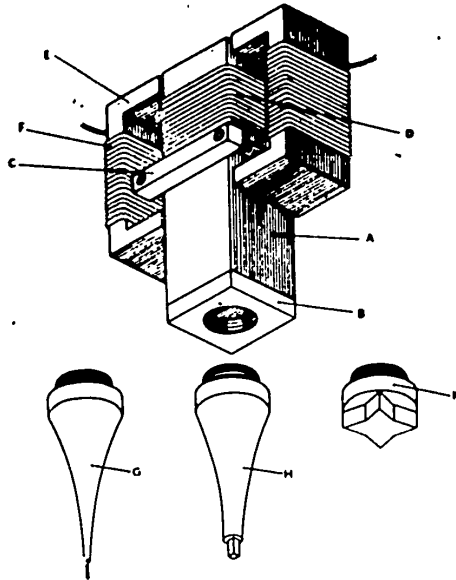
Drill Head in an Ultrasonic Drill Press.
